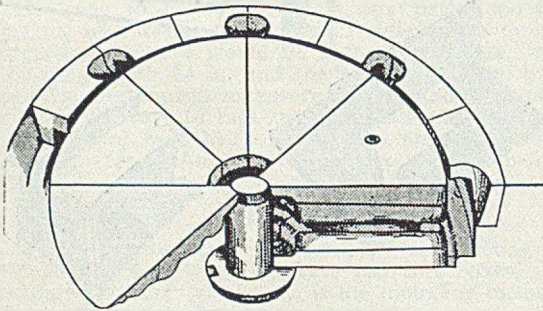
SECTION OF DRAG MOULD WITH CORES IN POSITION.
